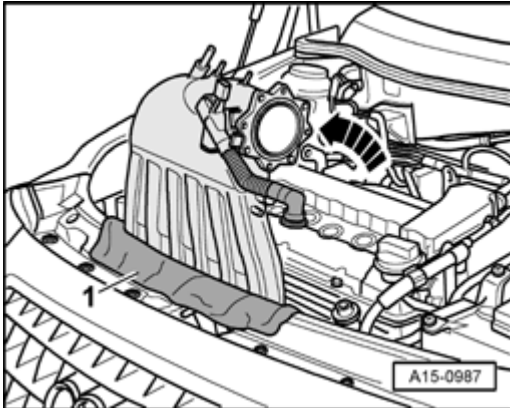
Protecting Intake Manifold From Damage With Clean Cloth & Swing Intake Manifold Forward
